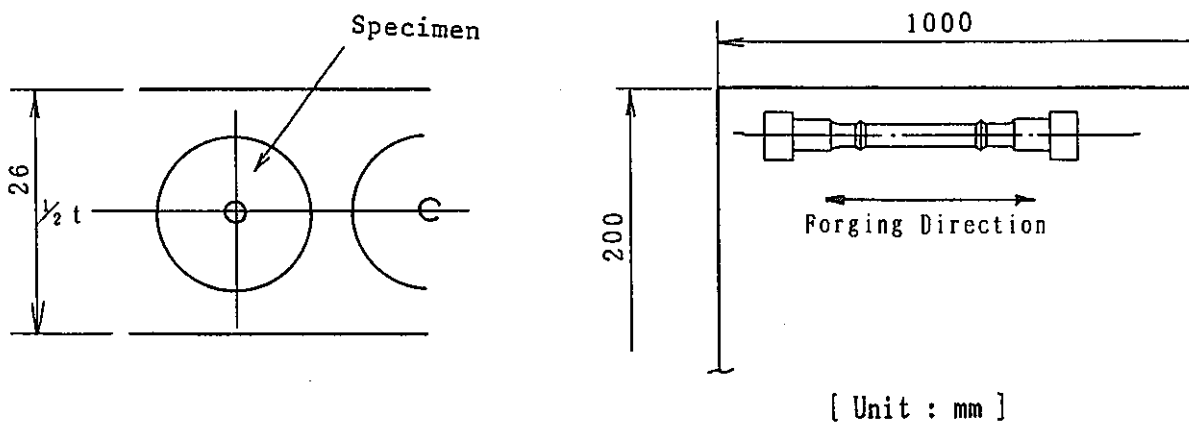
Sampling of Specimens (Type 304 Stainless Steel Rolled Plate)
